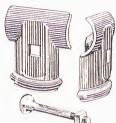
Illus-trating Chuck Split-Clip or Tee. Showing the various pieces before assembling.
